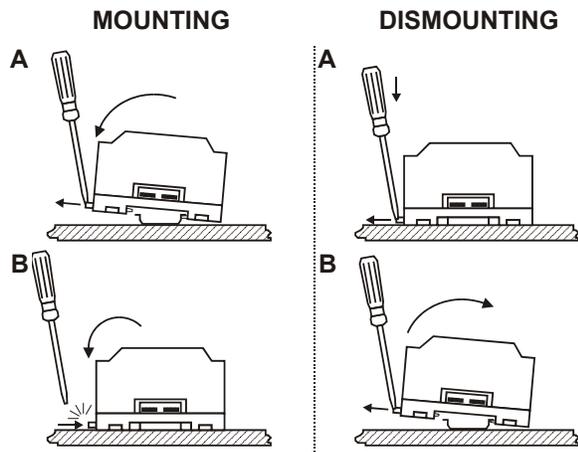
Mounting/dismounting on DIN rail (recommended)
